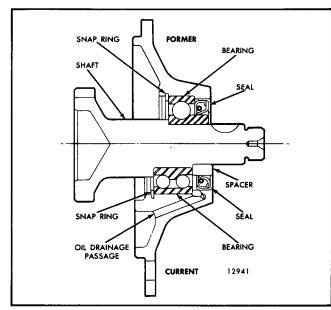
· Former and Current Drive Plate Type Accessory Drive
